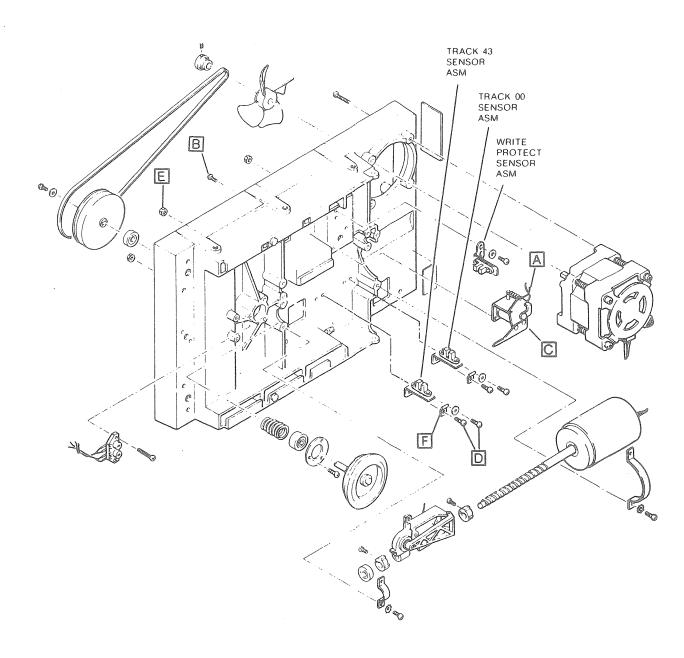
HEAD LOAD SOLENOID AND SENSOR ASSEMBLIES REMOVAL AND REPLACEMENT
